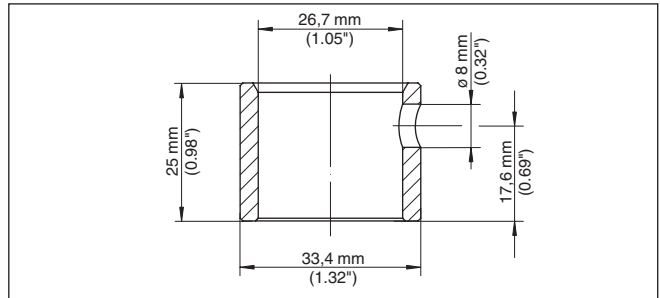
Dimensions of welded socket, PMC 1" VEGABAR 82
